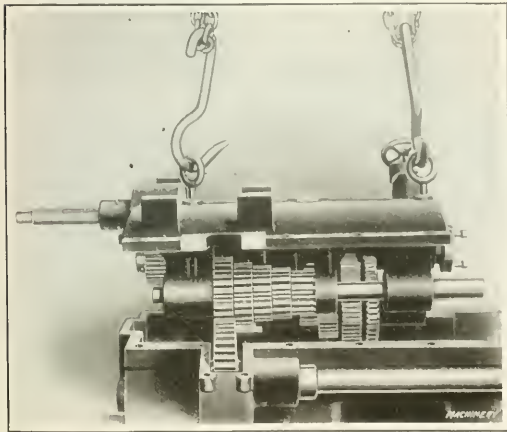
How Mechanism is supported by Cover to facilitate Quick Removal
